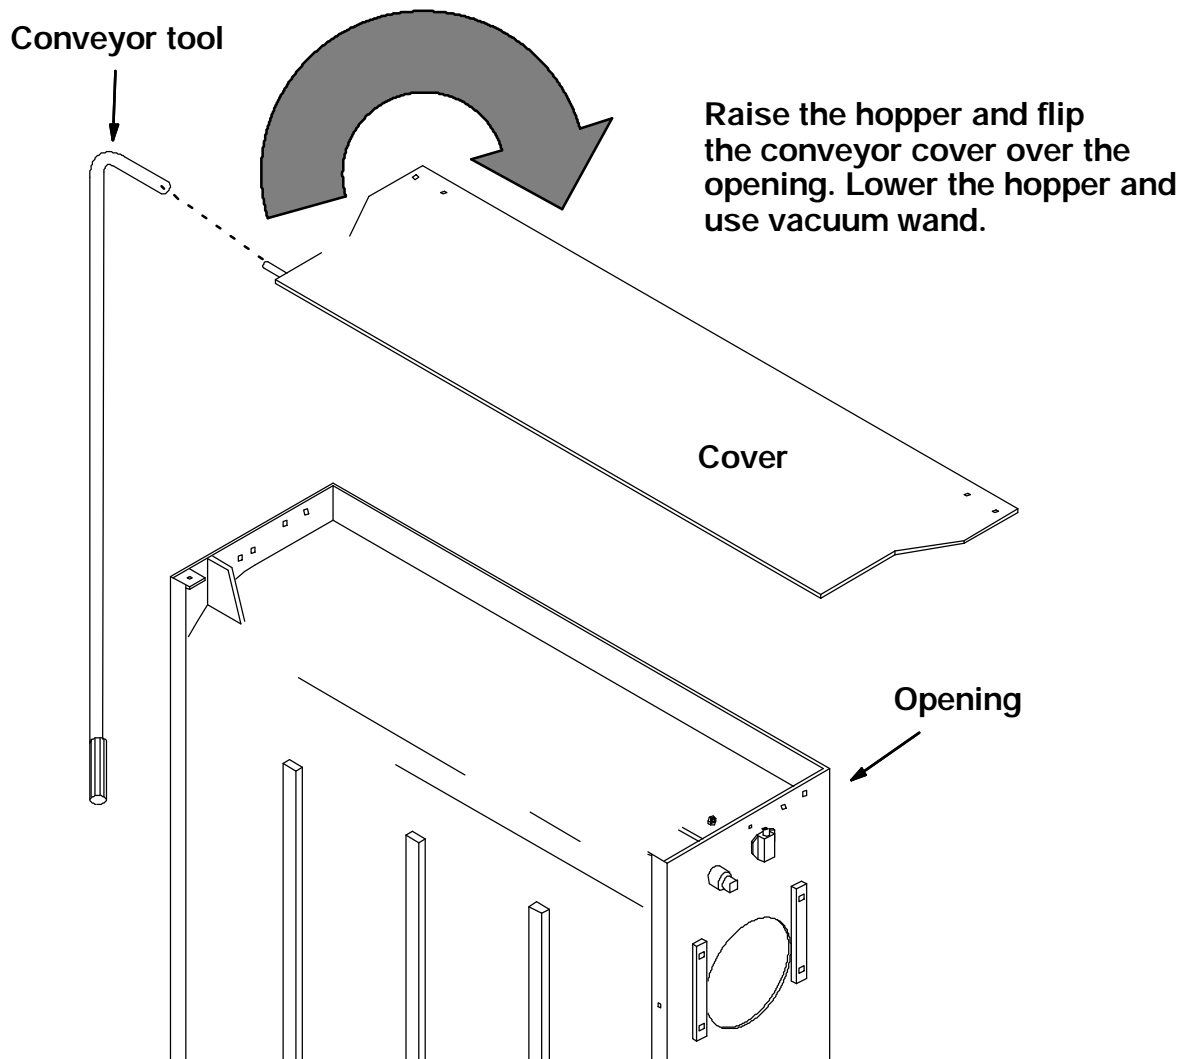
Flip The Conveyor Door To Operate Vacuum Wand
